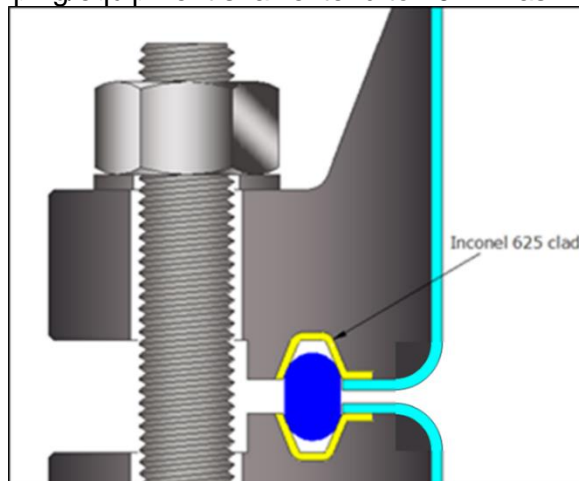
Coating in RTJ flange. The ring grooves shall be coated in CRA
